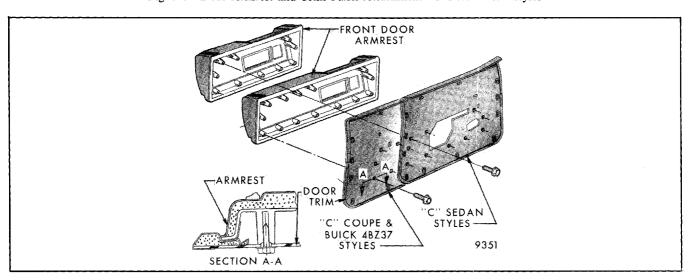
Preassembly of Door Armrest to Trim Panel Assembly - C and Buick 4BZ37 Styles
